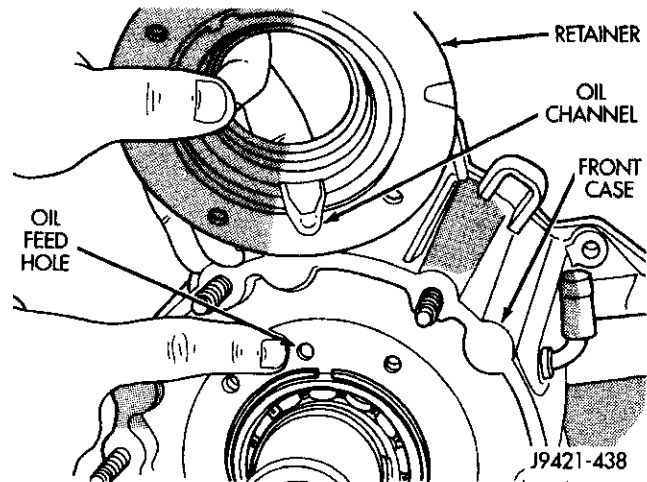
Retainer Oil Channel And Case Oil Feed Hole Locations
